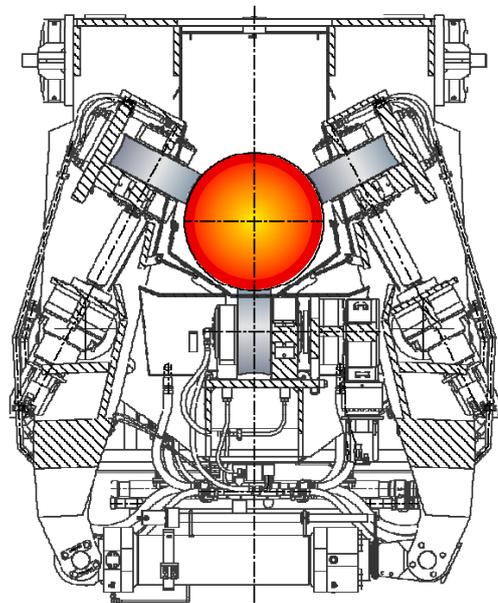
New holding force technology – strand guide with multi roller drive elements.
